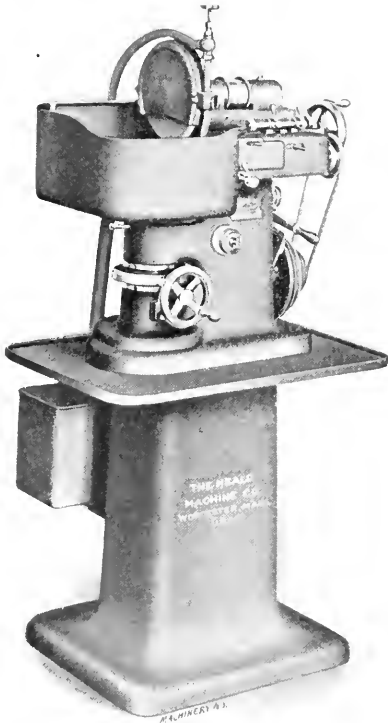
Heald Ring Grinder arranged for Wet Grinding.
